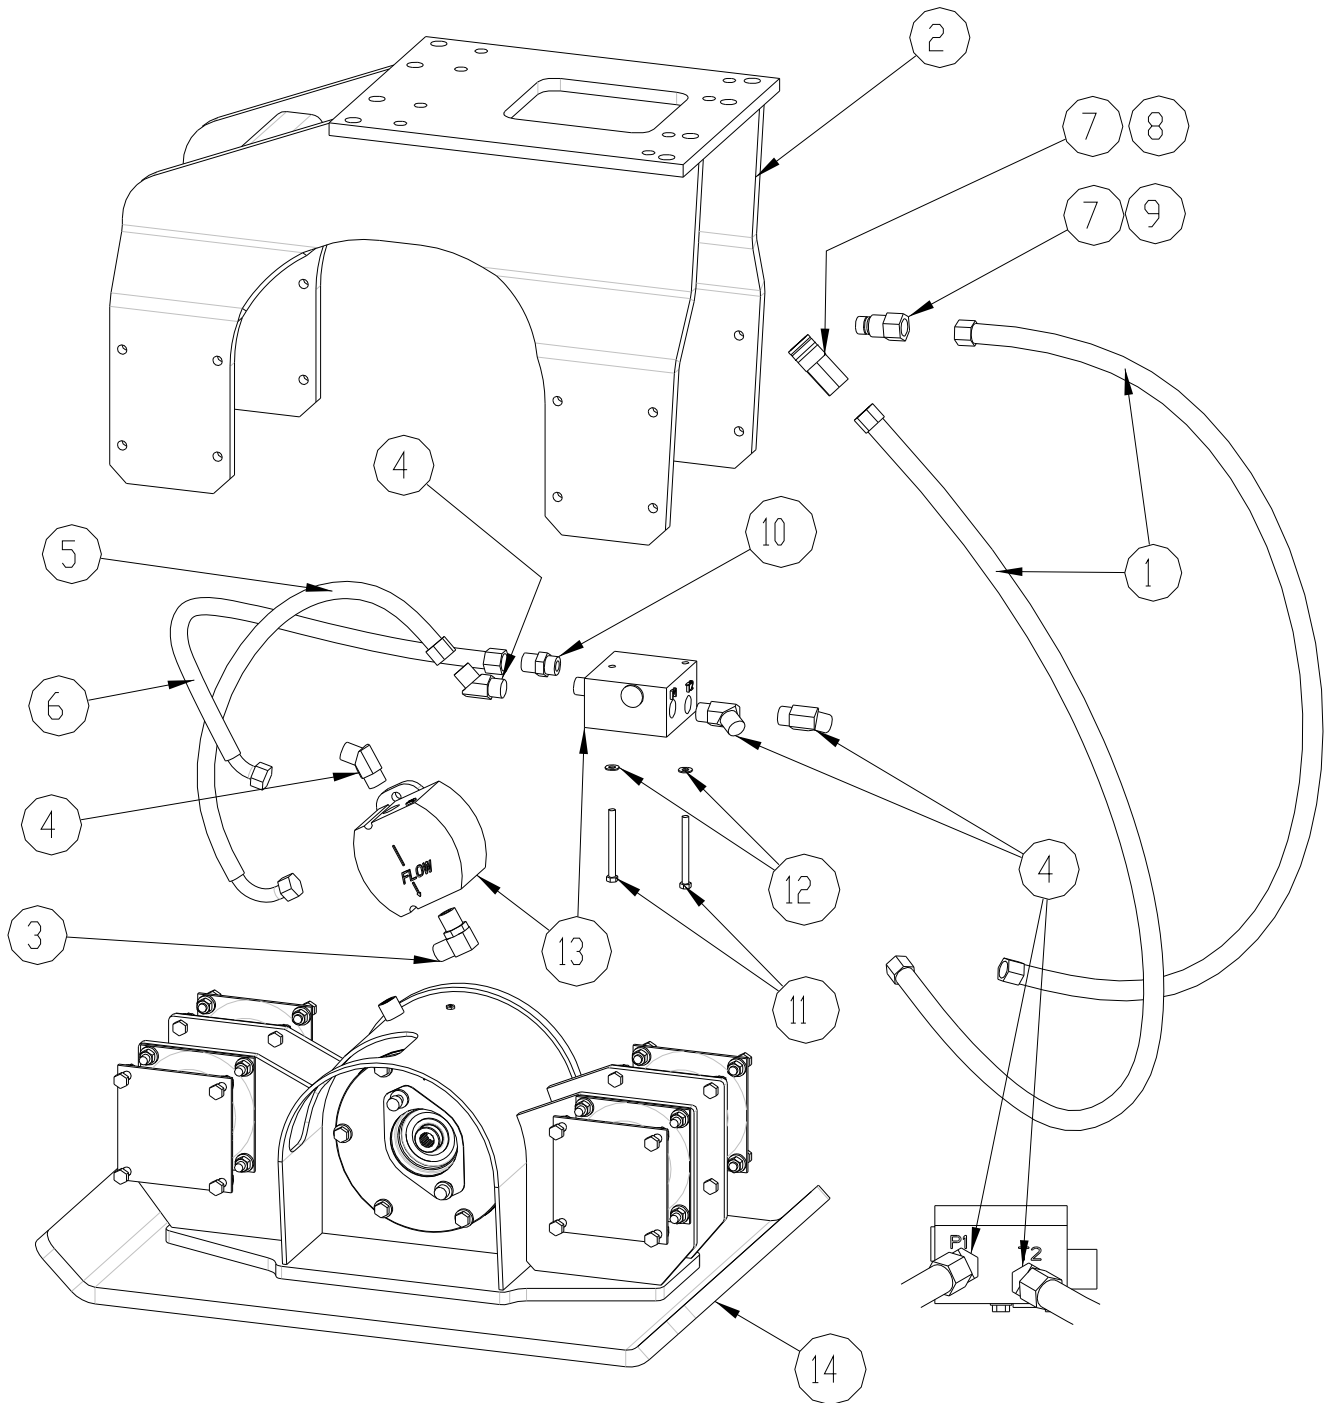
BR / SR Mounting Frame Ho-Pac
